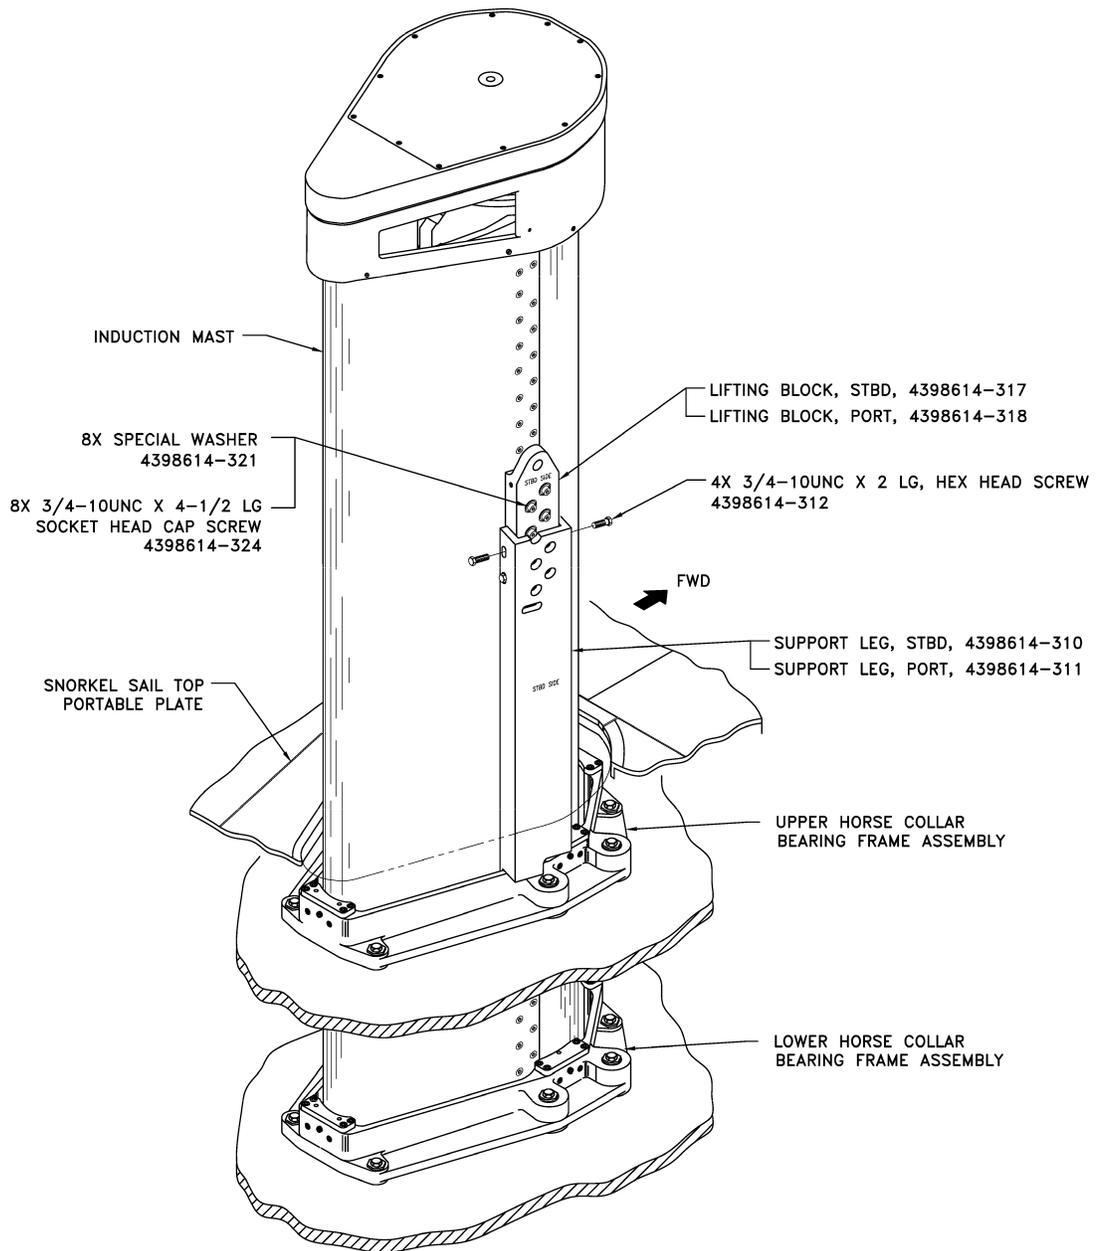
Lifting Block Supported by Bearing Frame via Support Legs
